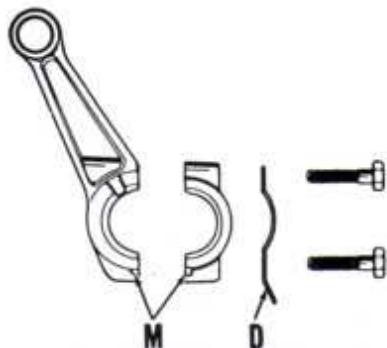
Connecting rod assembly used on Models VH70, VM70, VM80, VM100, HH70, HM70, HM80 and HM100. Note position of oil dipper (D) and match marks (M).
